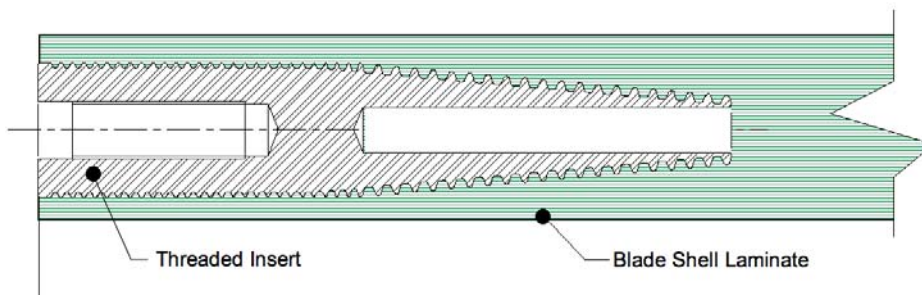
Schematic cross-section drawing of a threaded insert root attachment.
